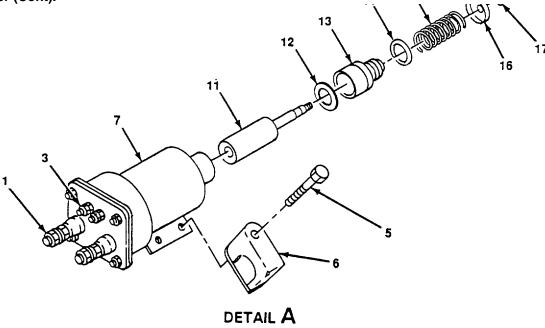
Starter, Disassemble (Sheet 1 of 2).
